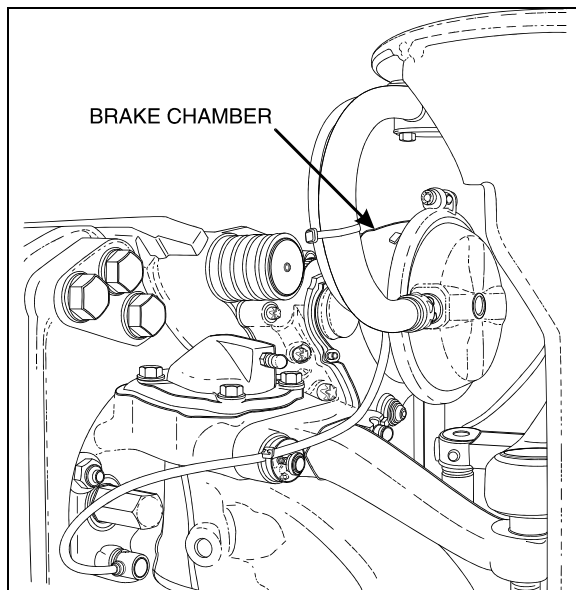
FRONT AXLE BRAKE AIR CHAMBER 12158
